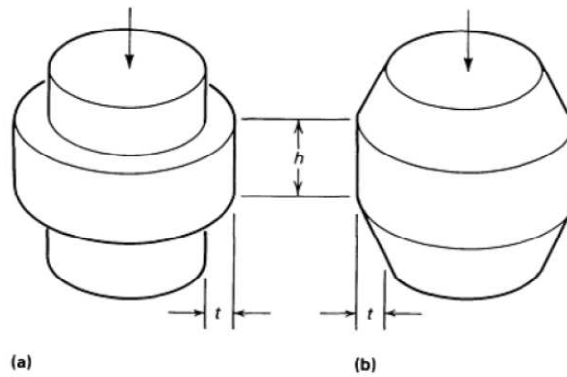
Flanged (a) and tapered bulged (b) specimens.
